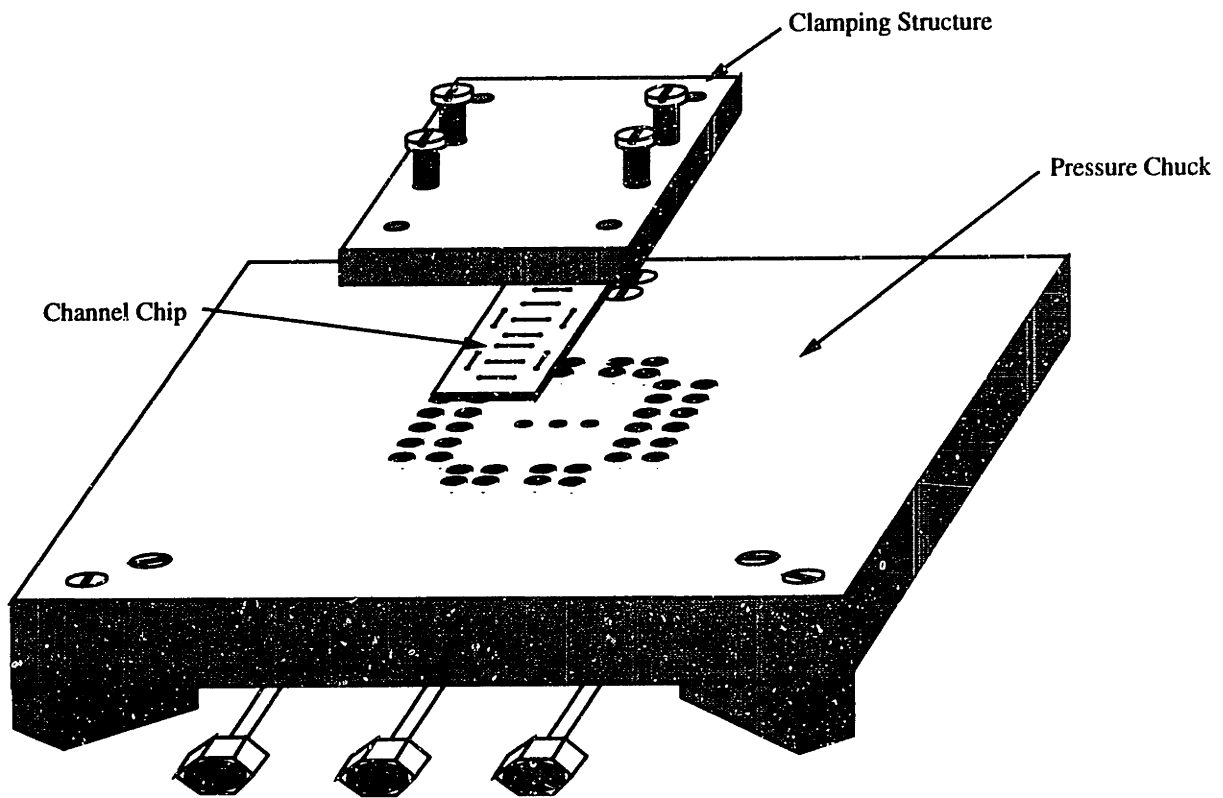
Exploded view of final wafer chip and mounting hardware
